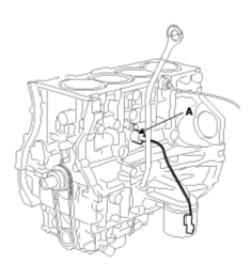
Identifying Oil Pressure Sensor Courtesy of HYUNDAI MOTOR CO.
